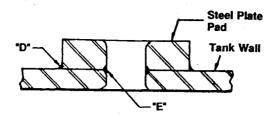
Pad outlets. Weld "D" is the same as "A," except penetration is not required. Drill two $\frac{1}{s-in}$. diameter holes, 180° apart, through weld for vent. Weld "E" plate must be bevelled distance equal to thickness of tank wall. Weld is to be built up above the surface of plate, peened and ground smooth and flush with plate.
